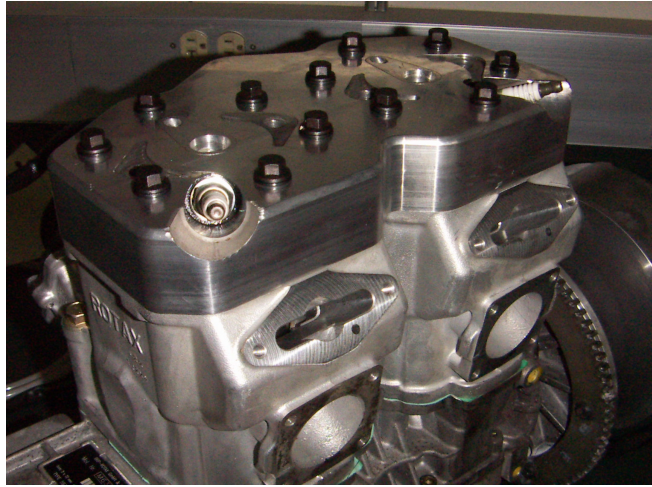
Completed UICSC DI head installed on the Rotax 600 H.O. engine.
